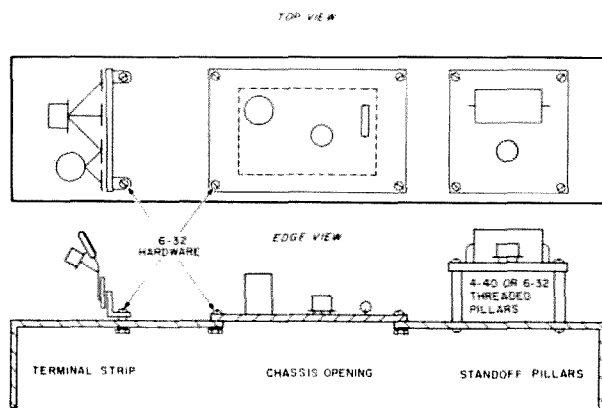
Three methods of mounting circuits to chassis or plates: terminal strips, chassis cutouts, and standoff pillars.
